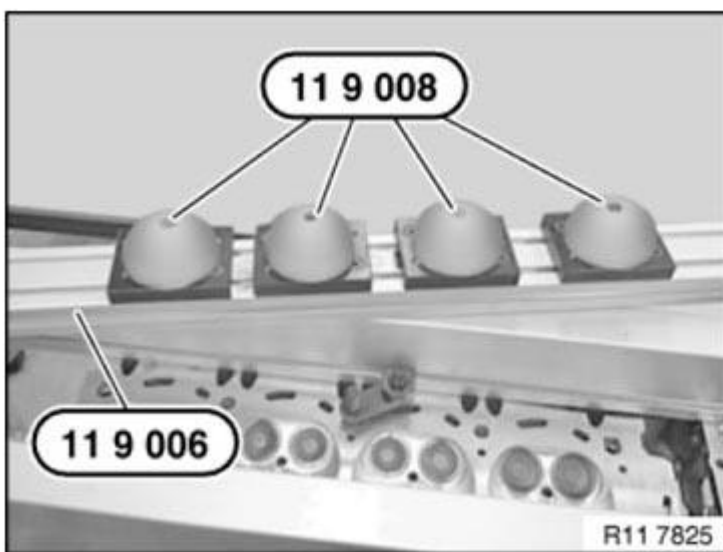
Preparing Special Tool 11 9 008 On Special Tool 11 9 006
